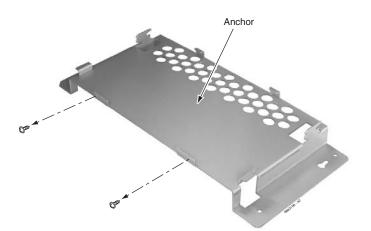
REMOVE THE SCREWS FROM THE MOUNTING BRACKET
